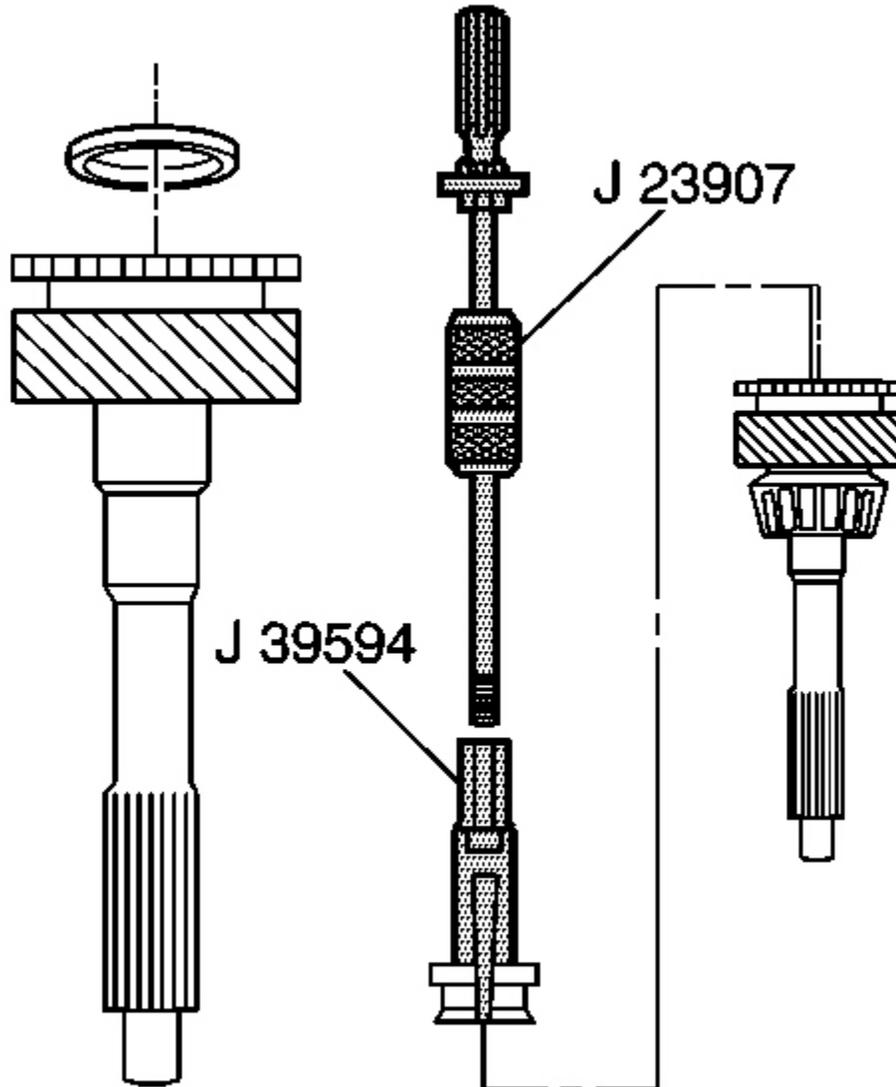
Removing Bearing Race From Input Shaft Using J 23907 And J 39594
